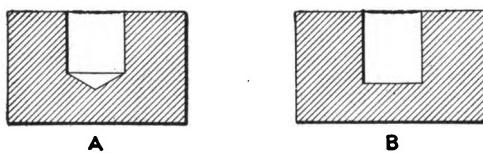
The bottom of a hole drilled by an ordinary drill and the bottom of a hole finished with a bottoming drill
